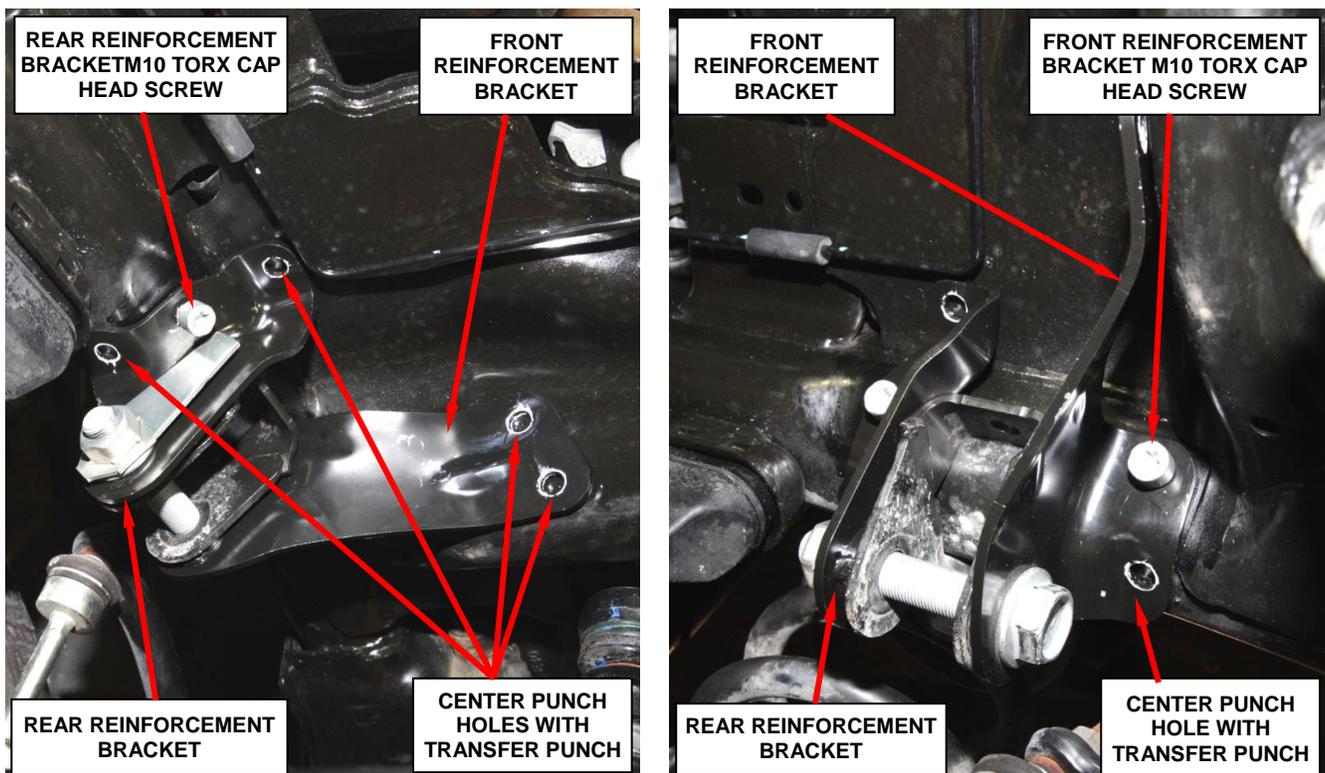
Center Punch All Remaining Track Bar Reinforcement Bracket Holes
